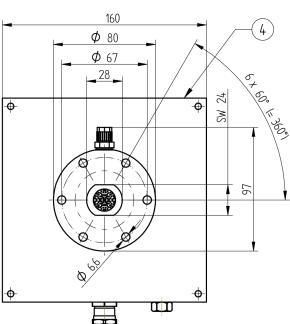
Dimensional drawing Combination Probe $KS2DNO_{\chi}$
